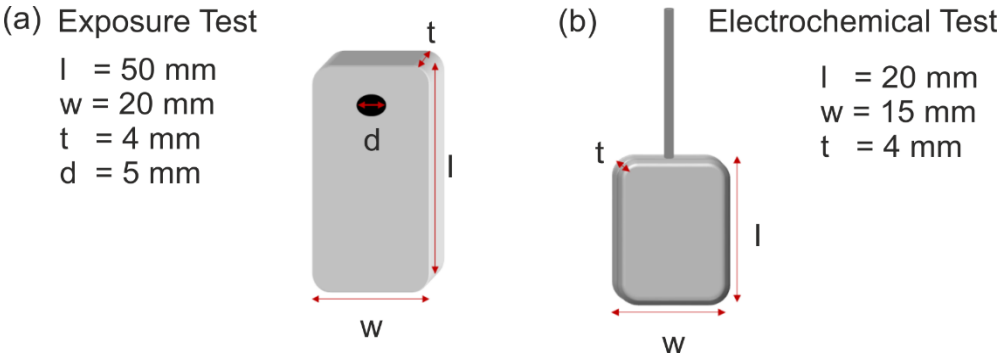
Specimen dimensions for (a) exposure test and (b) electrochemistry test
